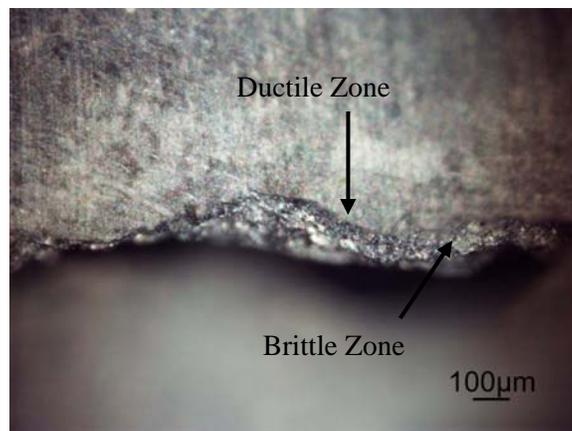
Fractured tab with aging to 450°C for 2 hours.
